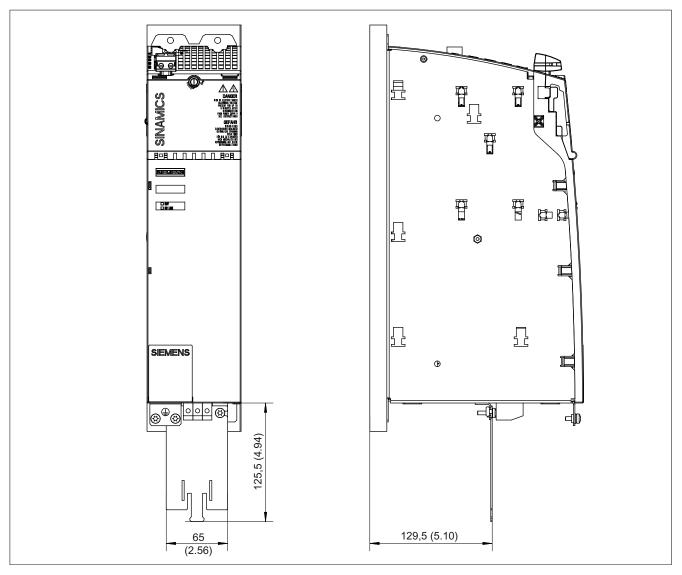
Dimension drawing of shield connecting plate on a 100 mm component with cold plate, all dimensions in mm and (inches)
